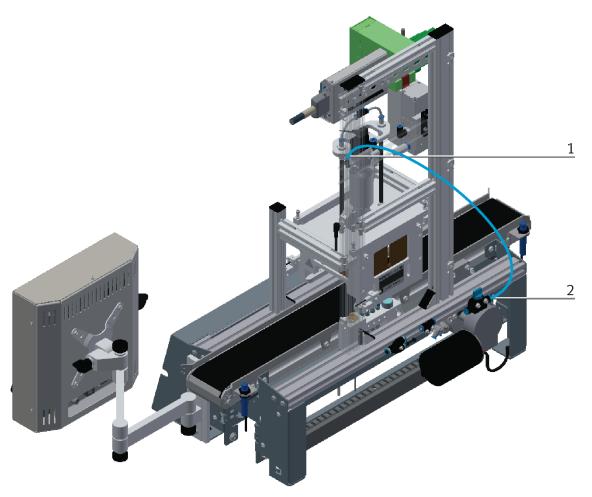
Connect CP application module pneumatically / Similar to illustration
